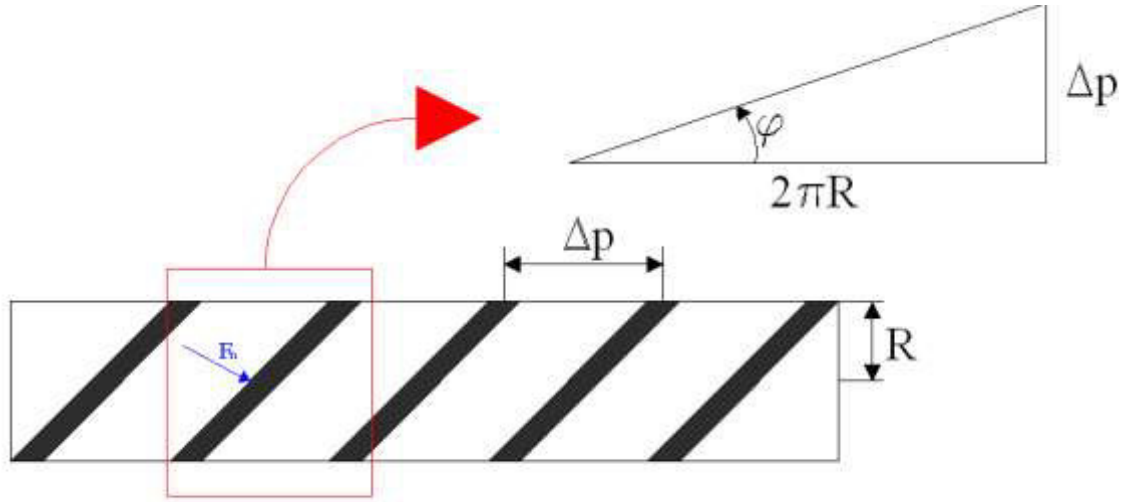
2D view of a screw: F_n is the force that acting between the screw and the nuts, Δp is the screw pitch, R is the screw radius and φ is the helical angle
